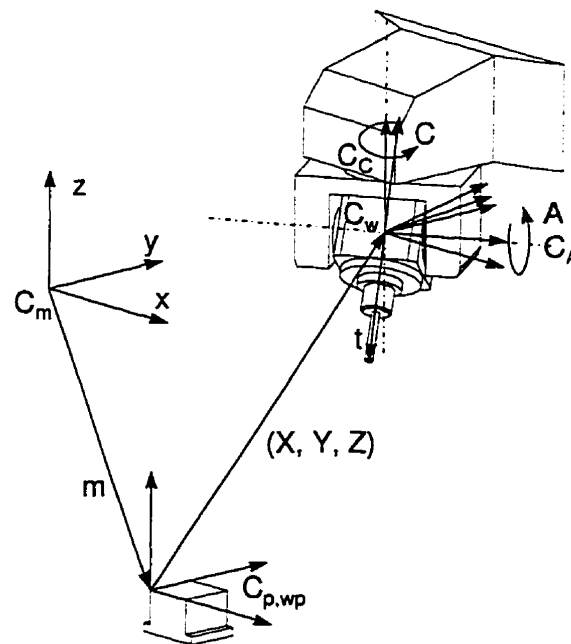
Kinematics of a 5-axis wrist type milling machine.
